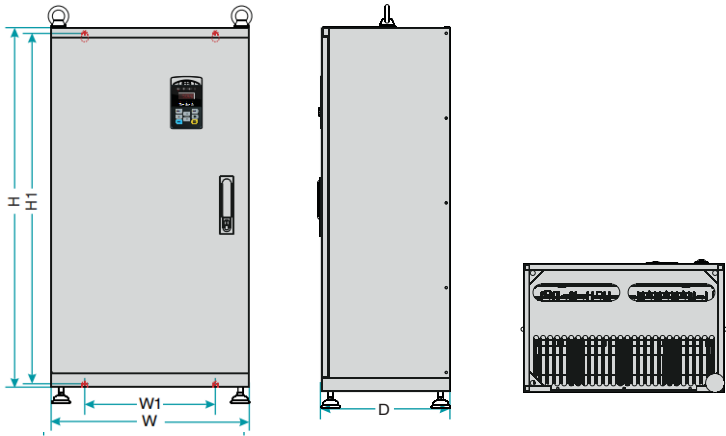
132KW~185KW AC drive installation dimensions and installation size
